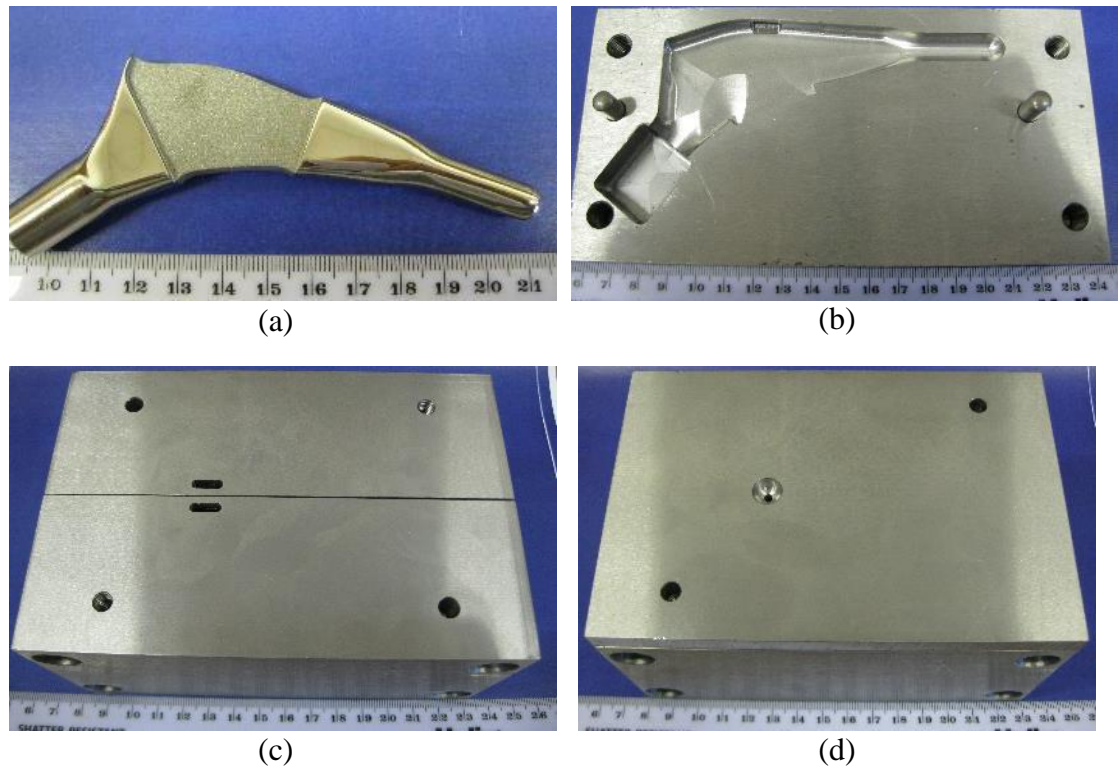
(a) femoral stem, (b) half-mould showing the cavity of the femoral stem, (c) the mould with the two halves assembled, (d) the mould after complete assembly of its parts showing the gate for injecting the feedstock in.
